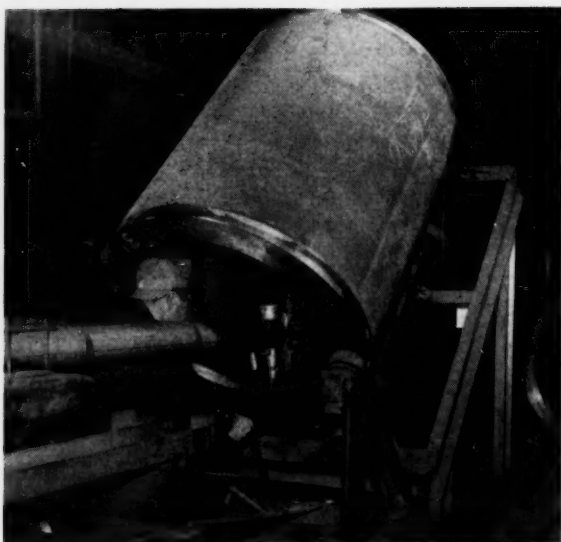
In this setup, a Lincoln "Squirt" welder mounted on a boom that remains fixed produces an internal circumferential weld to fasten the flange to the shell as the latter is rotated in an inclined position.
